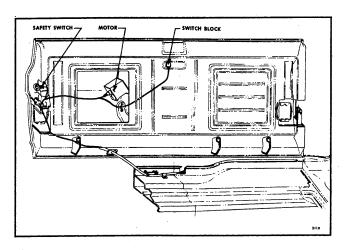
Tail Gate Wiring - Chevrolet "X" Bodies
